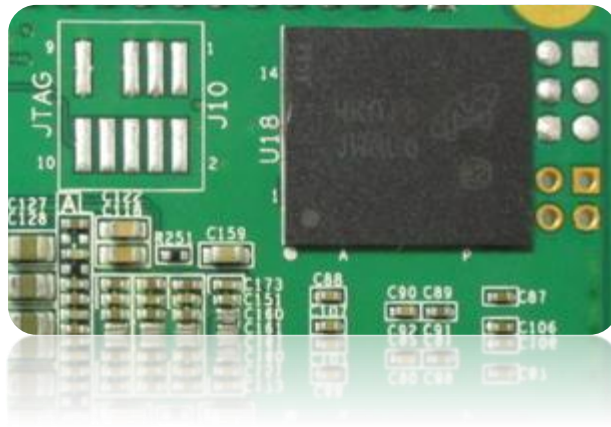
Footprint for JTAG header on bottom side of HiKey PCB
